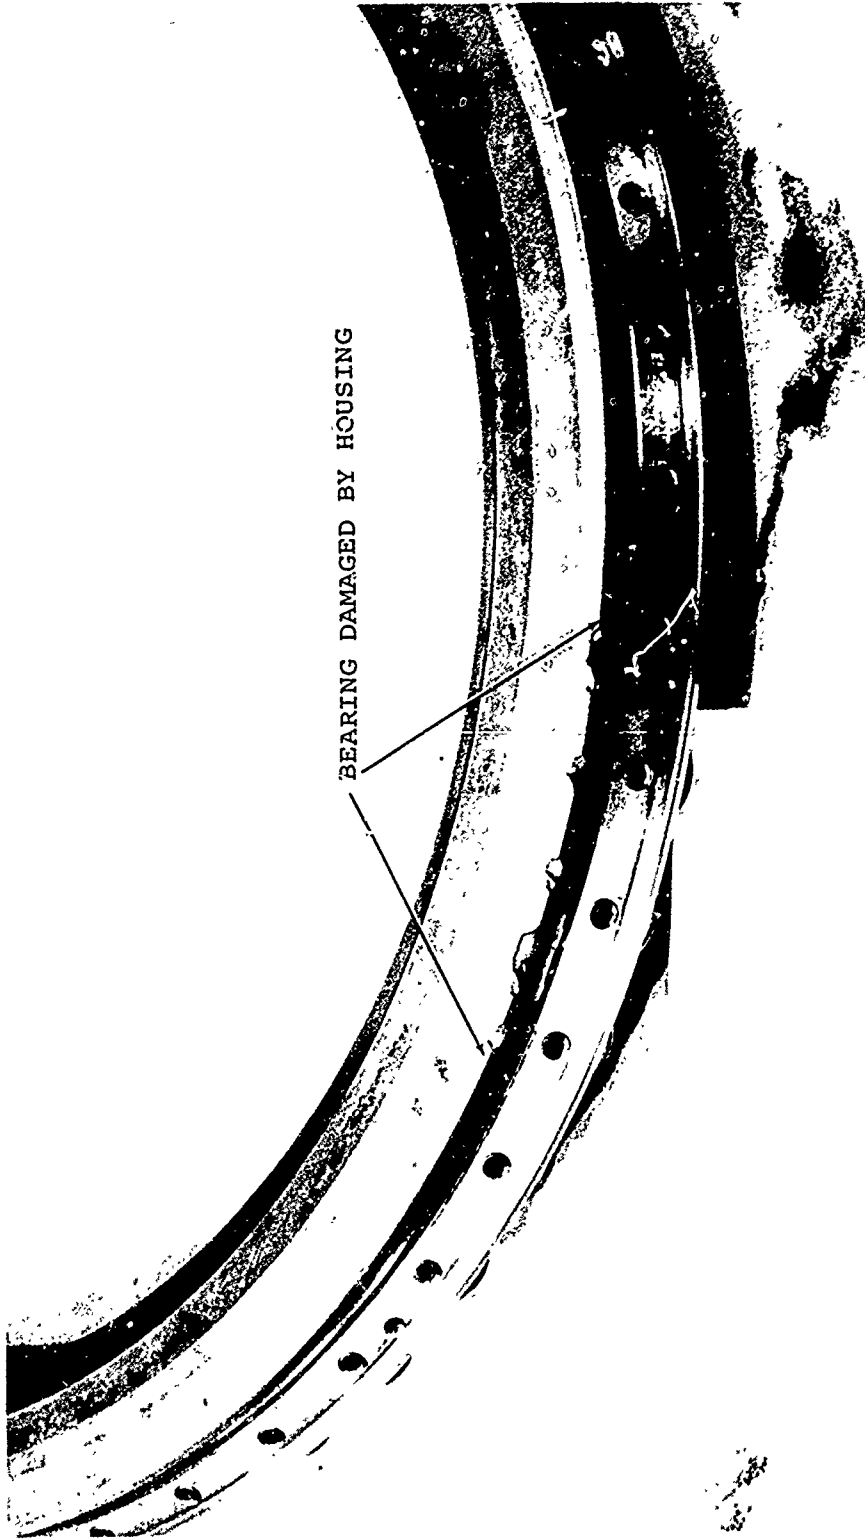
Condition of SK301-10257-1 Bearing (Upper Housing).
